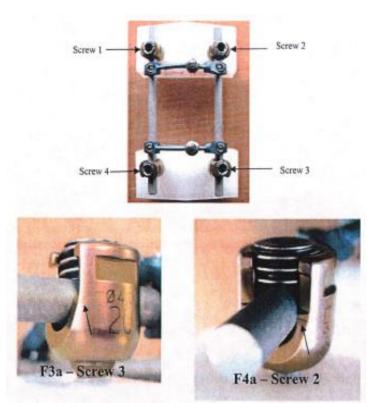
Typical Failure Mode Identified Under Fatigue Compression Test on XIA 3 Constructs Assembled with Radius Rod
